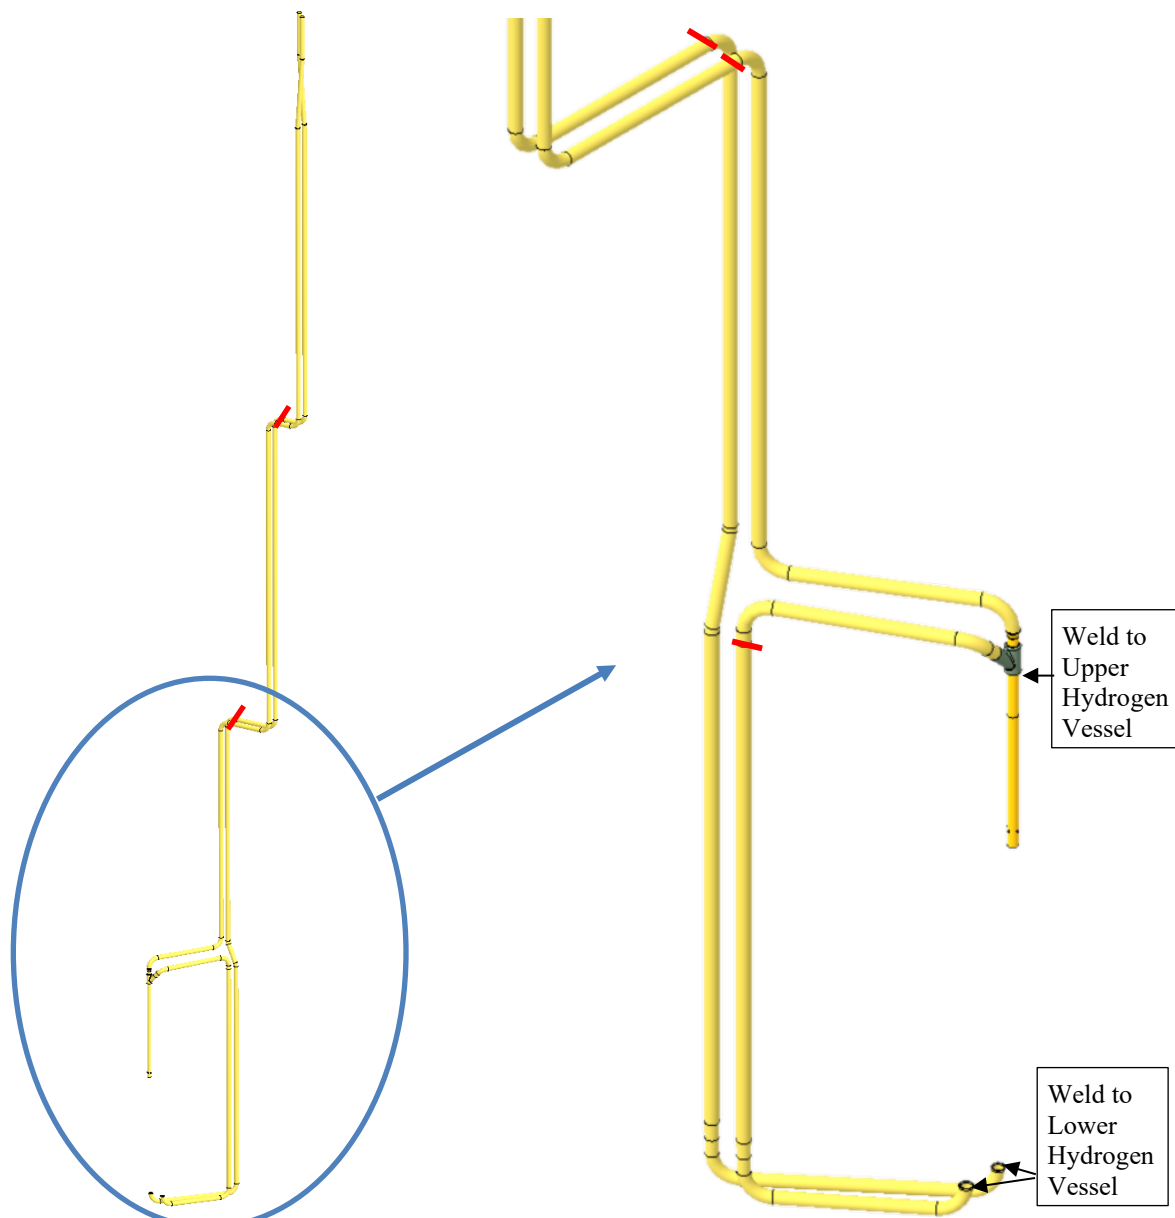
Hydrogen piping layout with divisions (to be welded at final assembly) shown in red.
